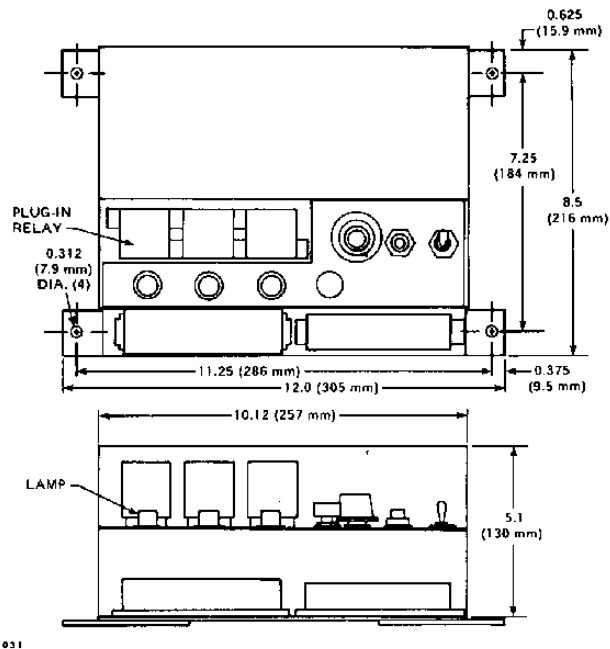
Mounting Dimensions of the Controller in Inches (mm).
